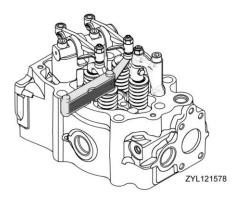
Outlet valve bridge / rocker arm valve clearance
